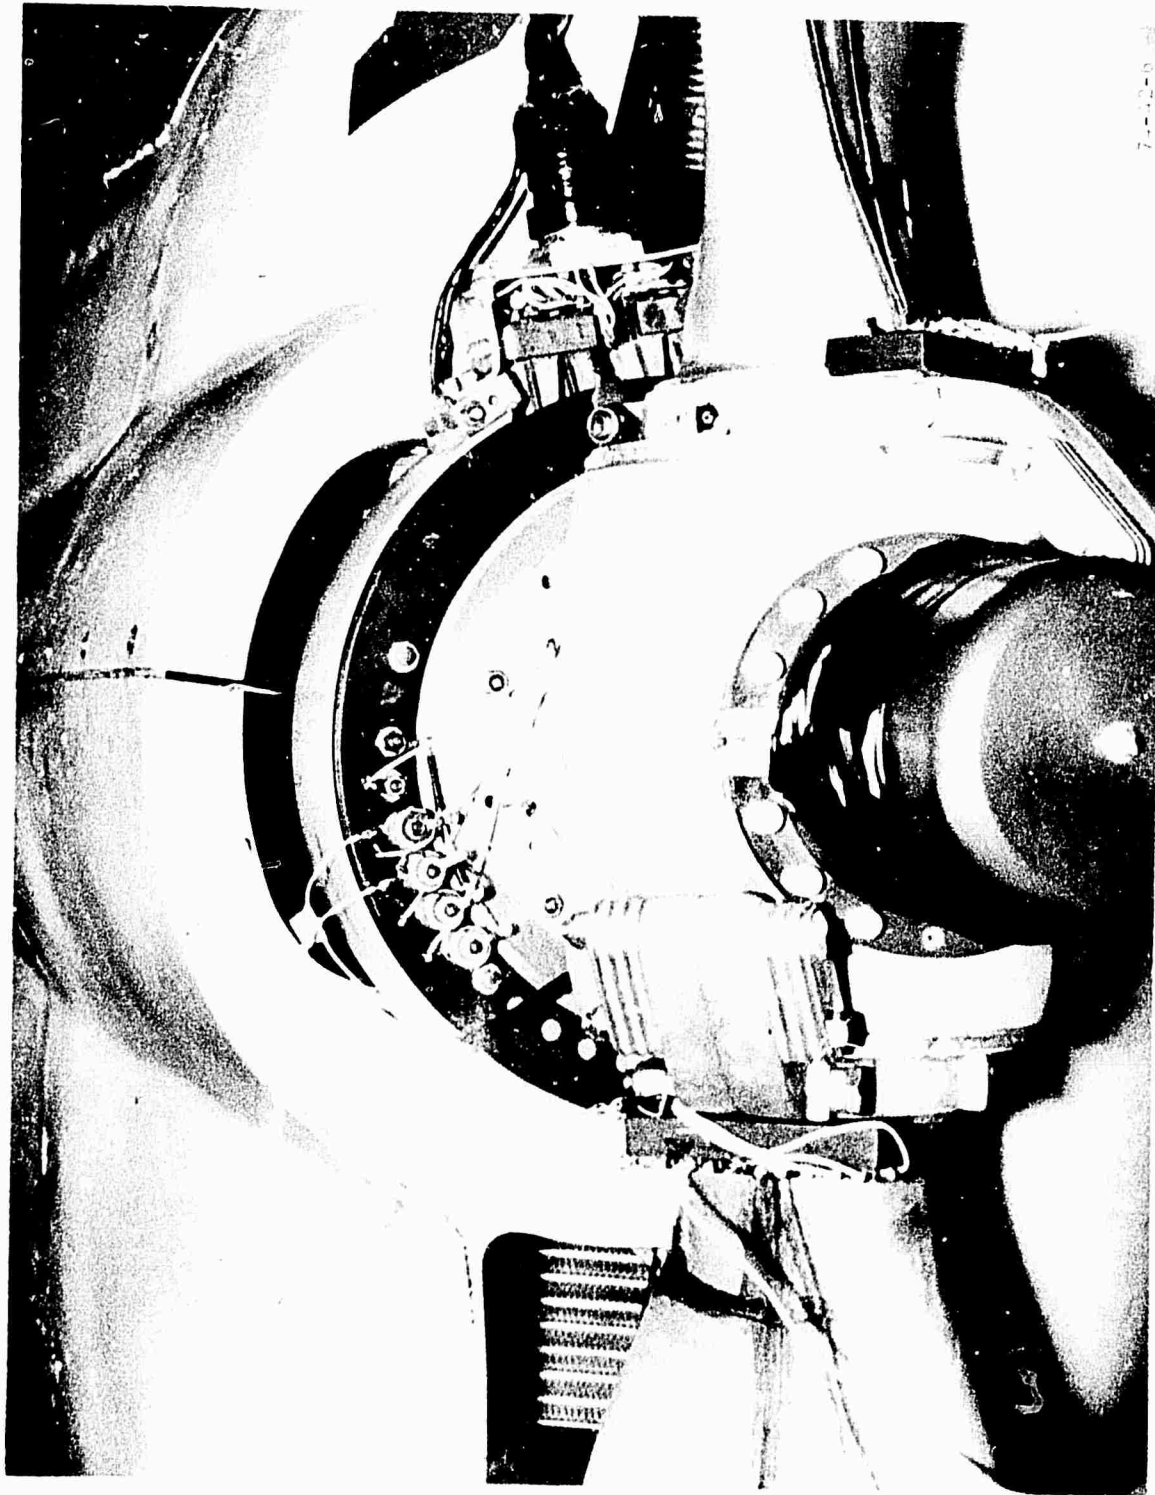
IMPROVED SLIPRING ASSEMBLY INSTALLED
